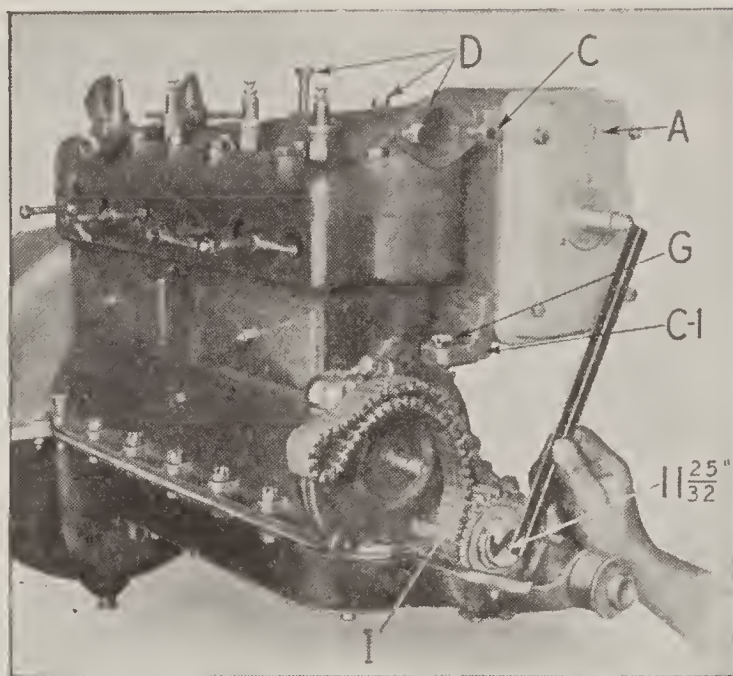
Adjusting Distance between Centers of Crankshaft and Motor Shaft
